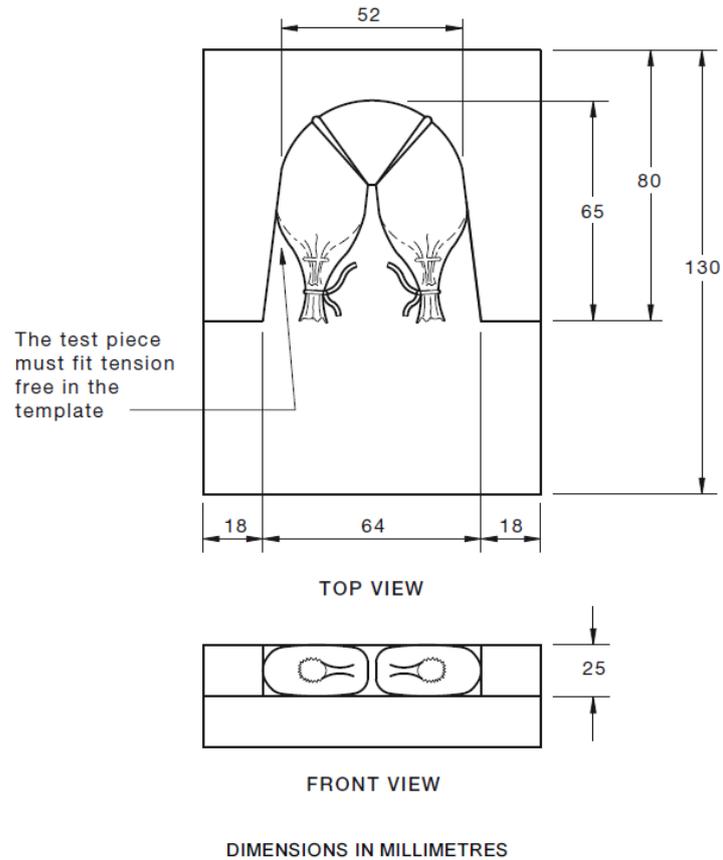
GAUGE TO CHECK THE FINISHED CONFIGURATION OF TEST PIECE
